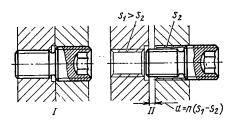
Assembly with bolt having threads different in pitch and diameter —after assembly; II—before assembly
